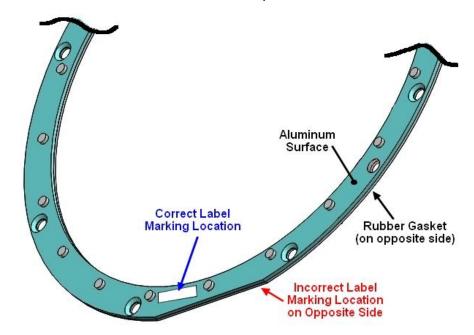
, Partial View of Retainer Assy Showing Incorrect Marking Label Location
